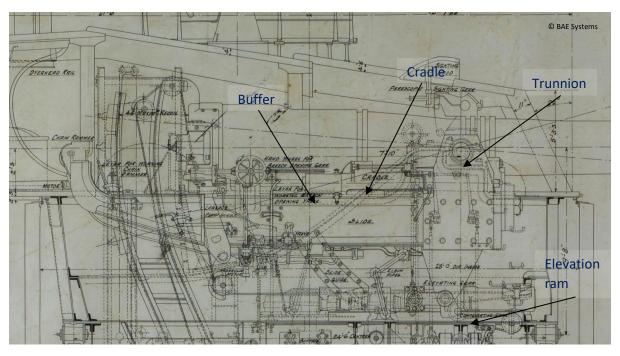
Section of plan image of gun, buffer, cradle, trunnion and elevation ram highlighted
